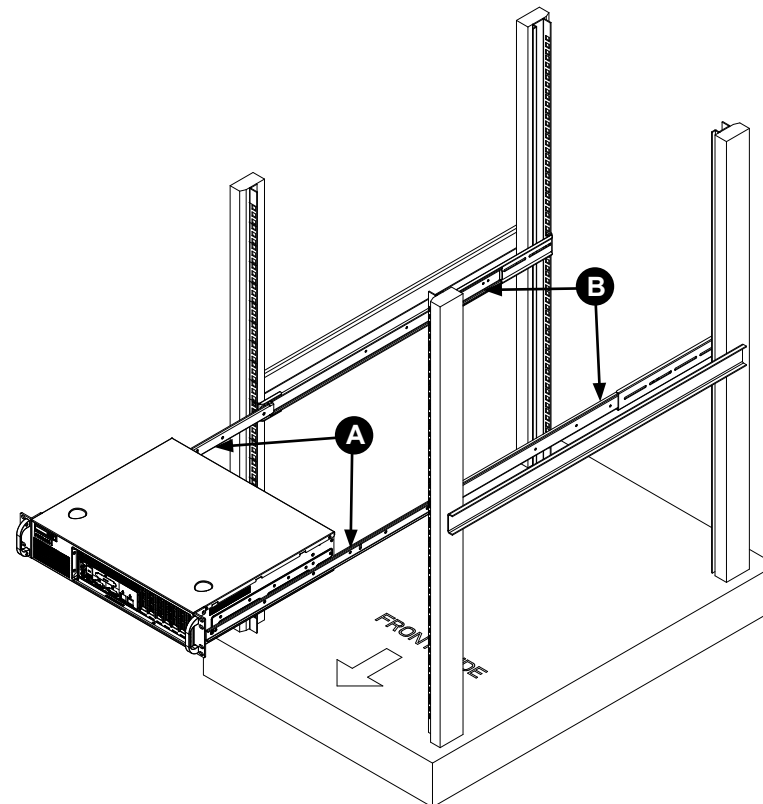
Inserting the Inner Rails into the Outer Rails
